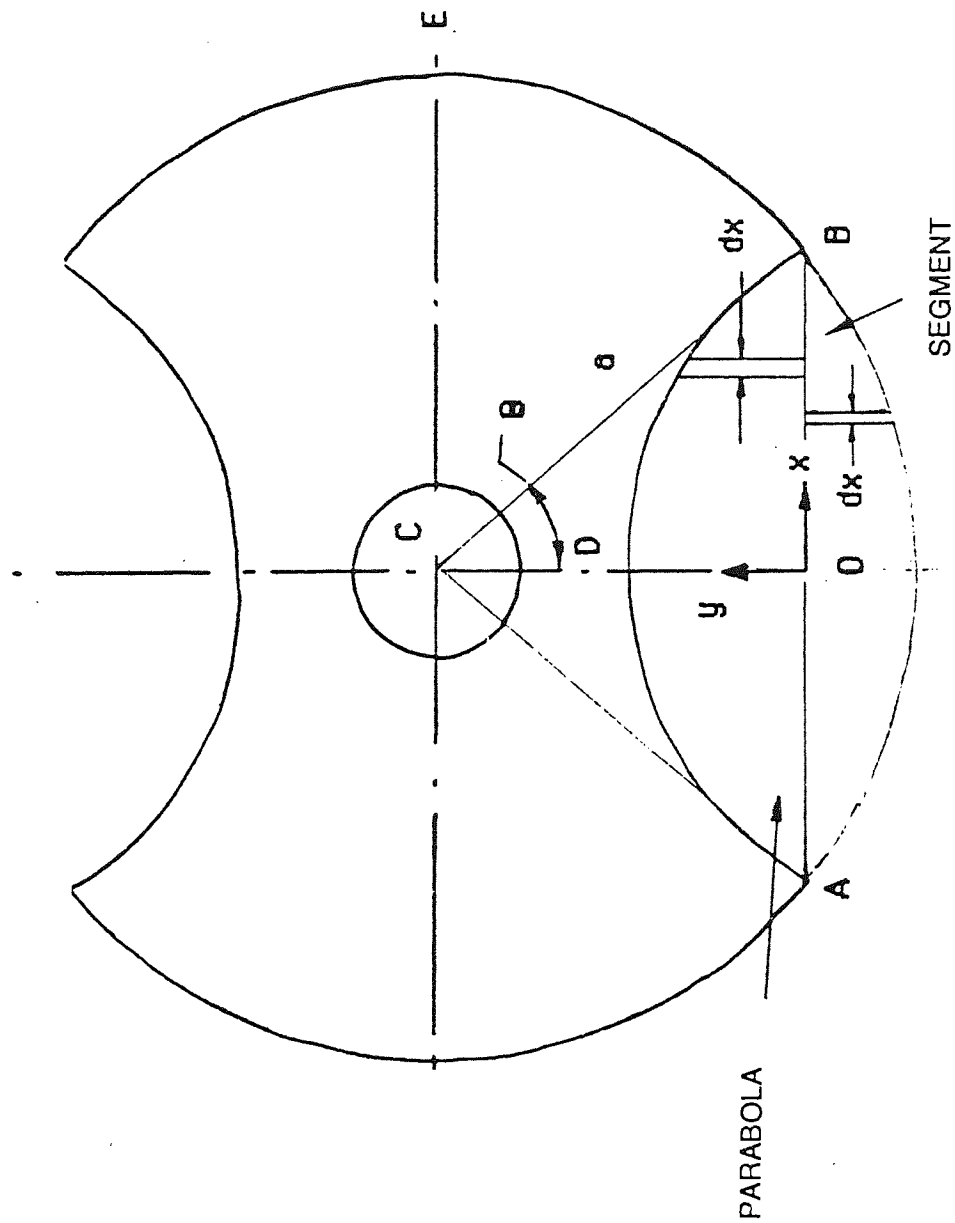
DRILL CROSS SECTION - PROTOTYPE NO 5
